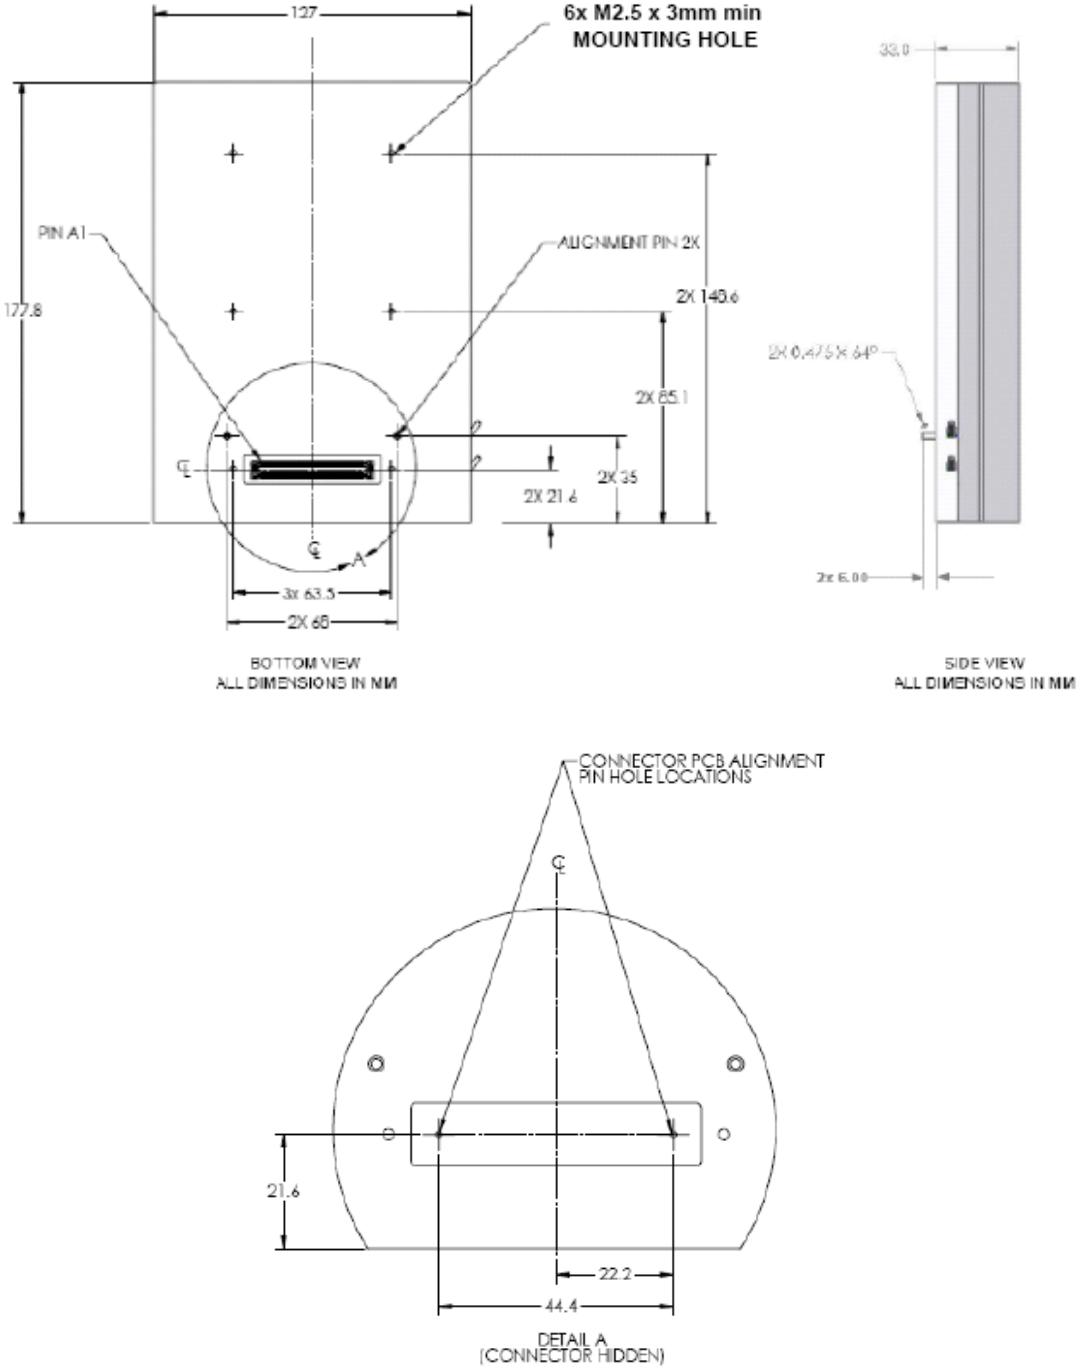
Mechanical Dimensions of MSA-100GLH with Integrated Heat Sink
